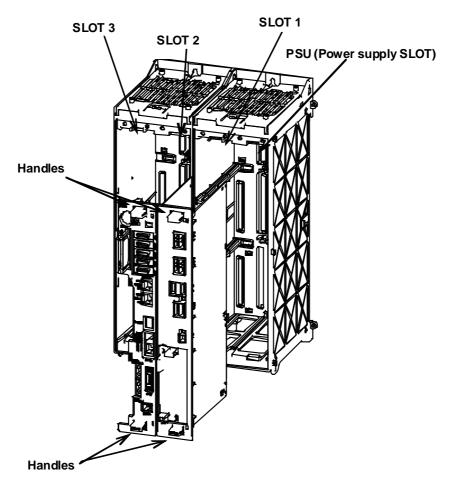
(b) Replacing the power unit and printed-circuit boards on the backplane
